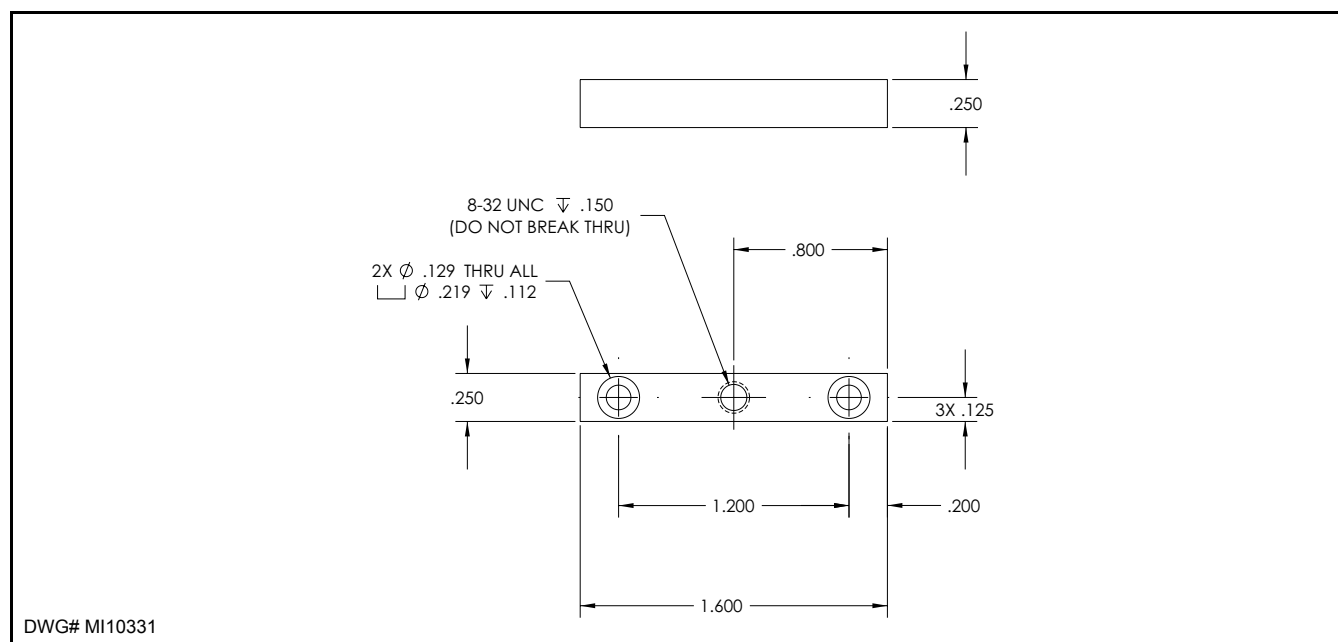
VariSpec Mounting Block for the 35 mm Aperture and LNIR-20-20 Filters
